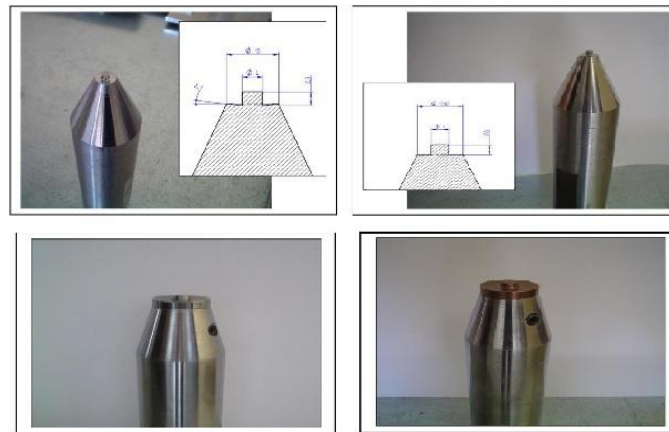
Tools with conic small shoulder, flat small shoulder, carbide tool large shoulder, carbide tool large shoulder with coating ^[2].
